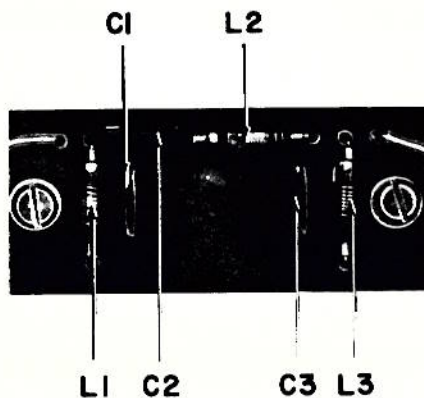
Type 79326 Bandpass Filter P. C. Board, Component Locations
